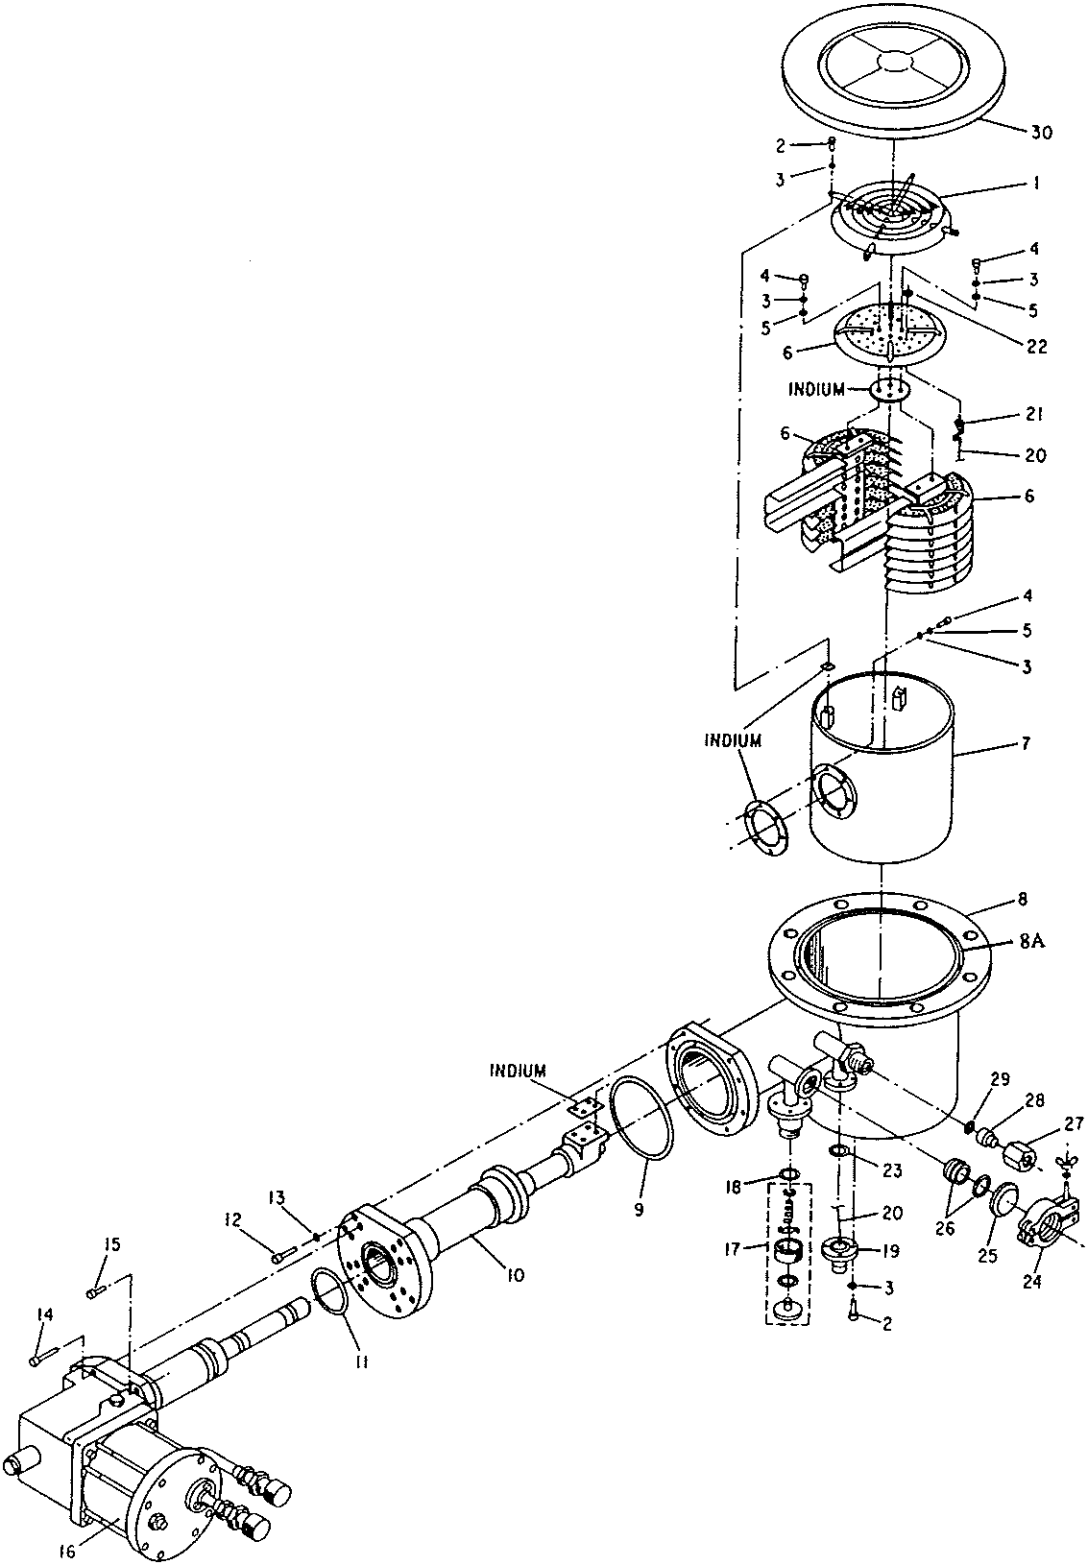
Exploded view of Cryo-Torr 8F Cryopump
